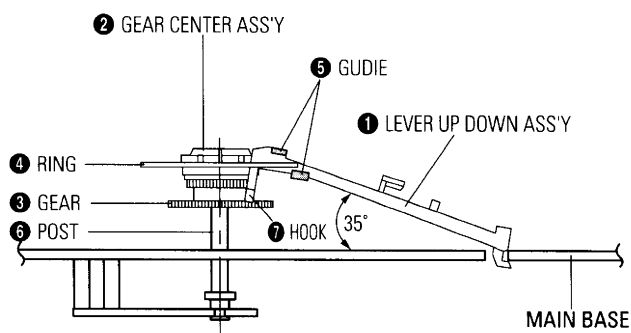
Assembly of Lever Up Down Ass'y, Gear Center Ass'y
